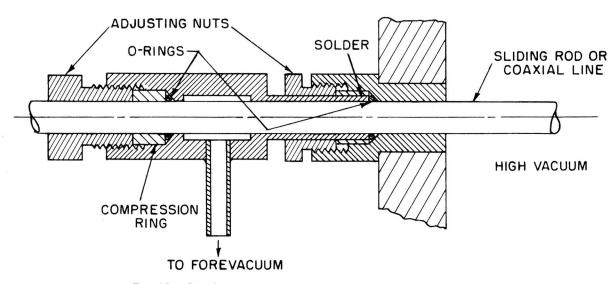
Double O-ring sliding seal for demountable vacuum system.
